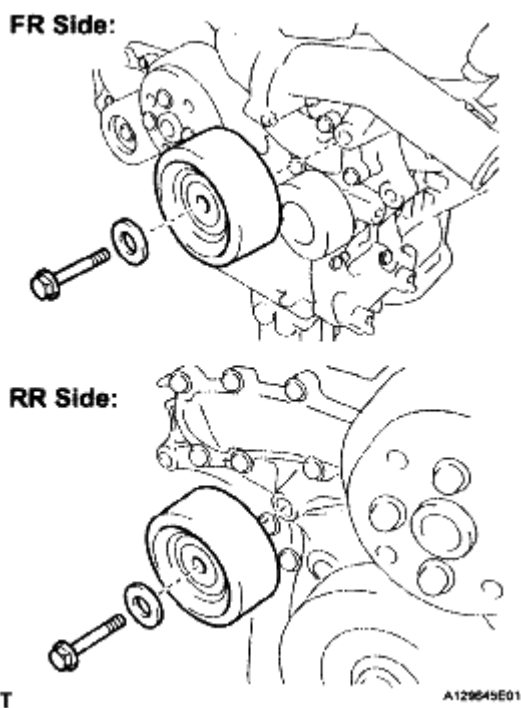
Identifying Bolts, Idler Pulley Cover Plates & No. 2 Idler Pulley Sub-Assemblies
